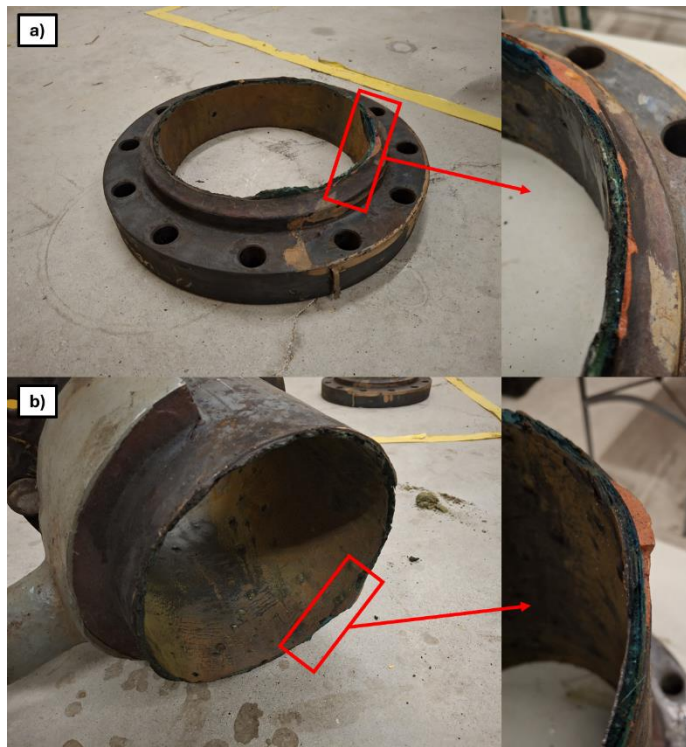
THE FAILURE INTERFACE OF THE A) FLANGE AND B) SPOOL.
